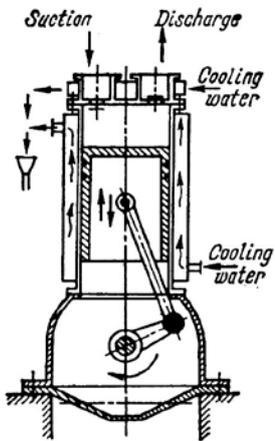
Single-stage reciprocating compressor. Schematic
